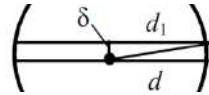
Misalignment of the ring gauge and the measuring axis of the comparator
